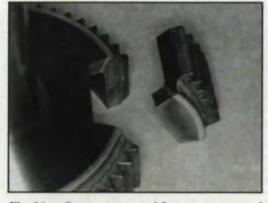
Segment removed from spur gear end of D6ac multi-metal sun gear for metallographic evaluation.
